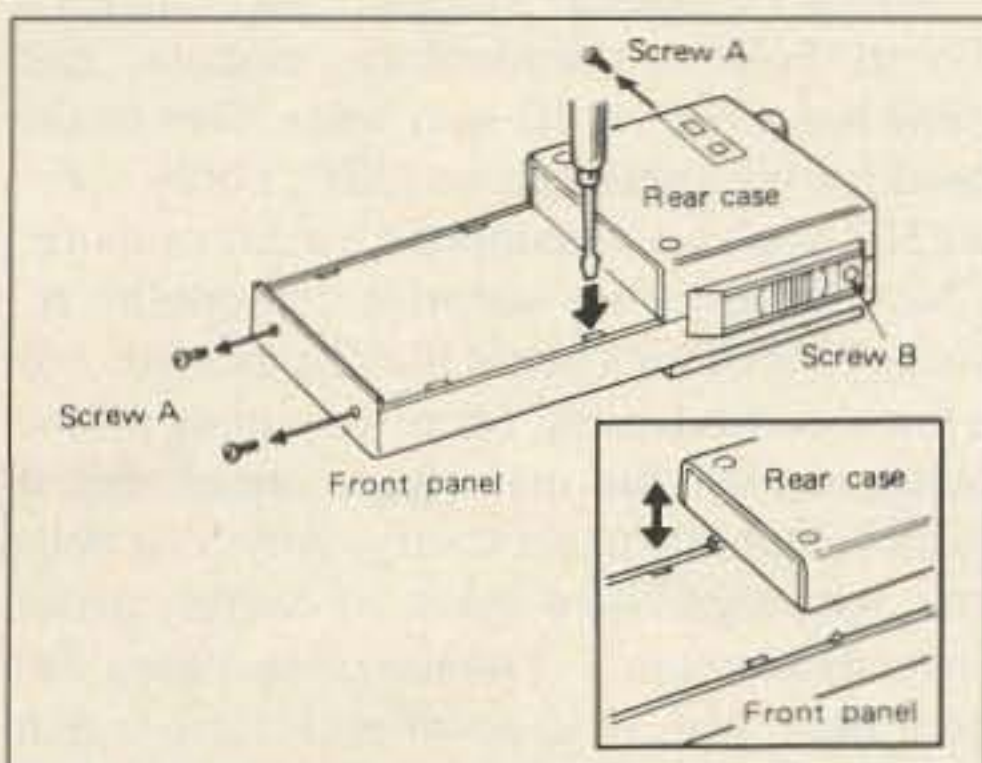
Disassemble the case by carefully removing three screws (A) and loosening screw B.
